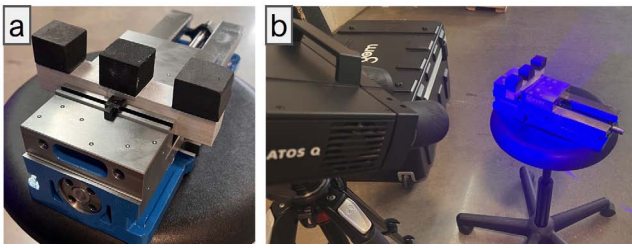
(a) Samples infiltrated and mounted to aluminum bar clamped in vise; (b) scanning of mounted samples for CAM and machining purposes.
